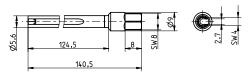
Mounting key ø5,6 mm, slotted, Type 1300B14
